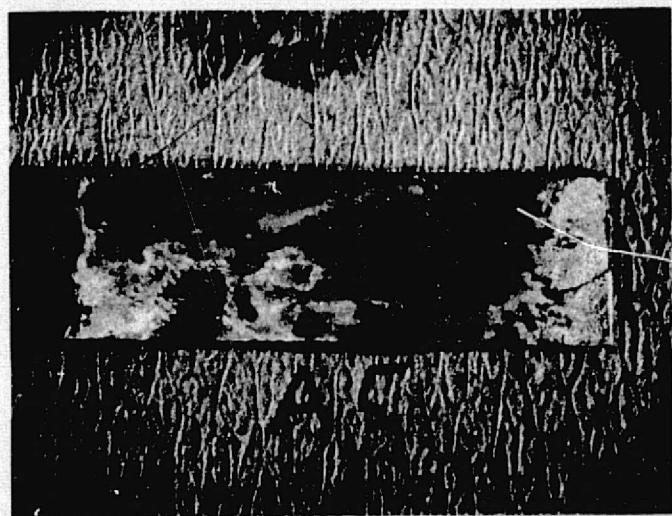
Aluminum Panel, Showing Through Pitting (Lower Right)
